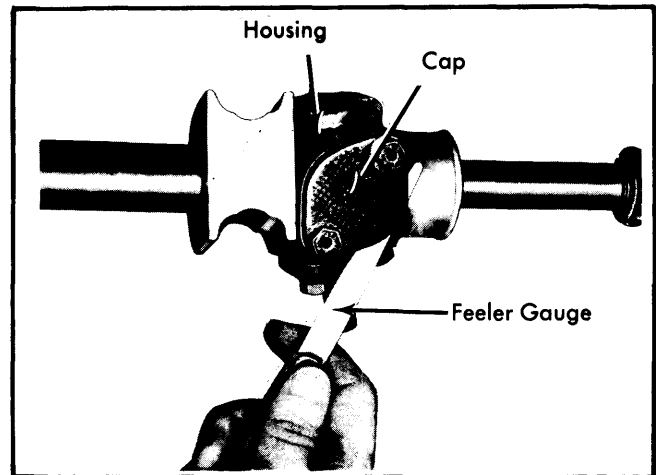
Measuring Clearance Between Cap and Gear Housing
